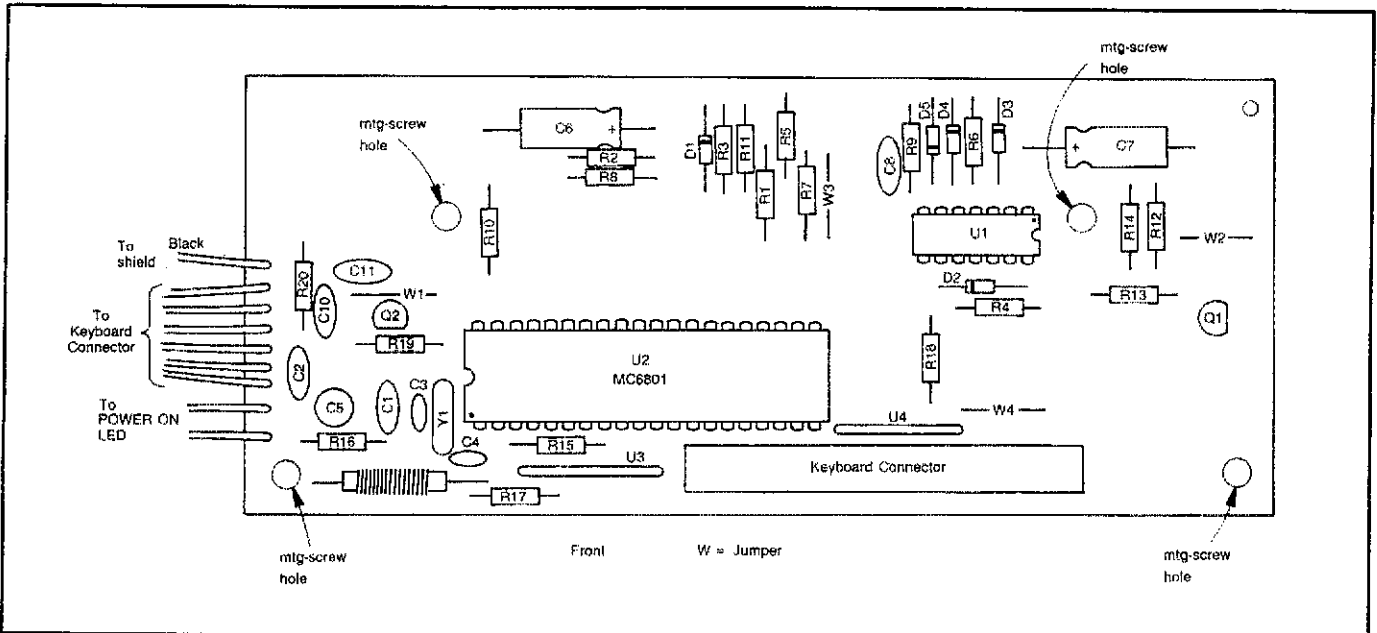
Parts placement on the unmodified ADAM keyboard PC board. Parts identification is made according to that on the revision C board. (There is no capacitor labeled C9.) Compare this drawing to that of Fig 5 to identify the placement of the removed and added components.
